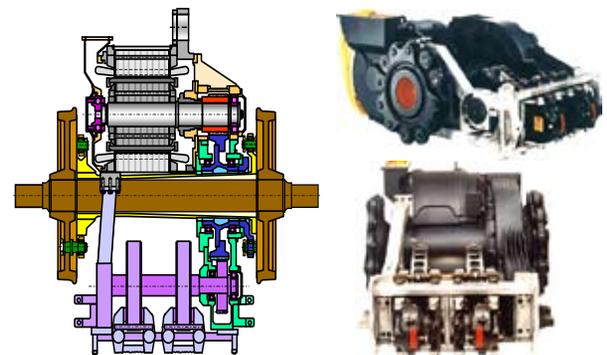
Integrated unit HAB with additional brake shaft (Siemens 1016/1116 – Taurus)
